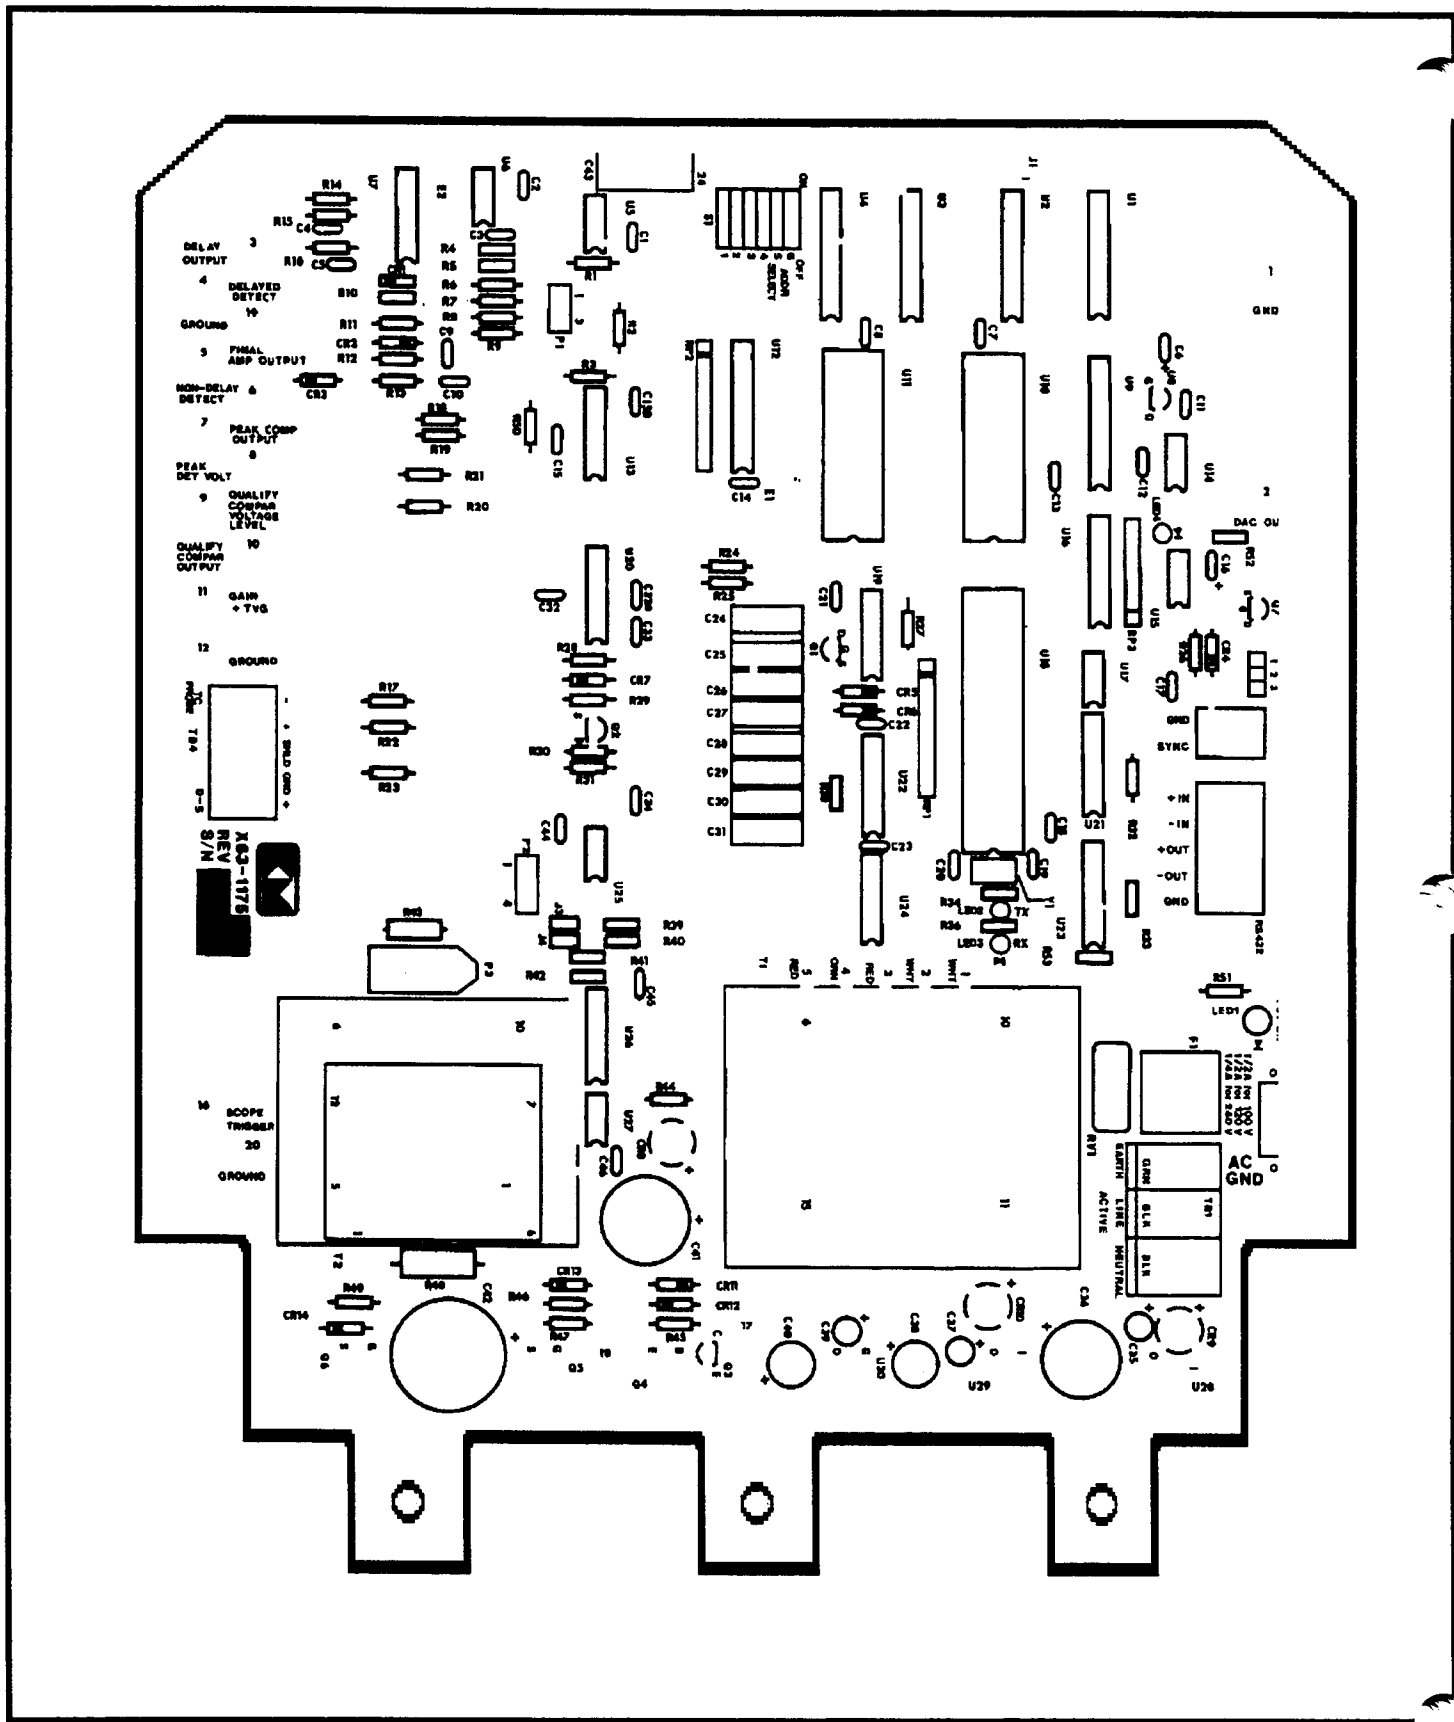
Assembly Drawing of the Intelligent Transceiver Unit (ITU) Board, P/N 63-1175.
